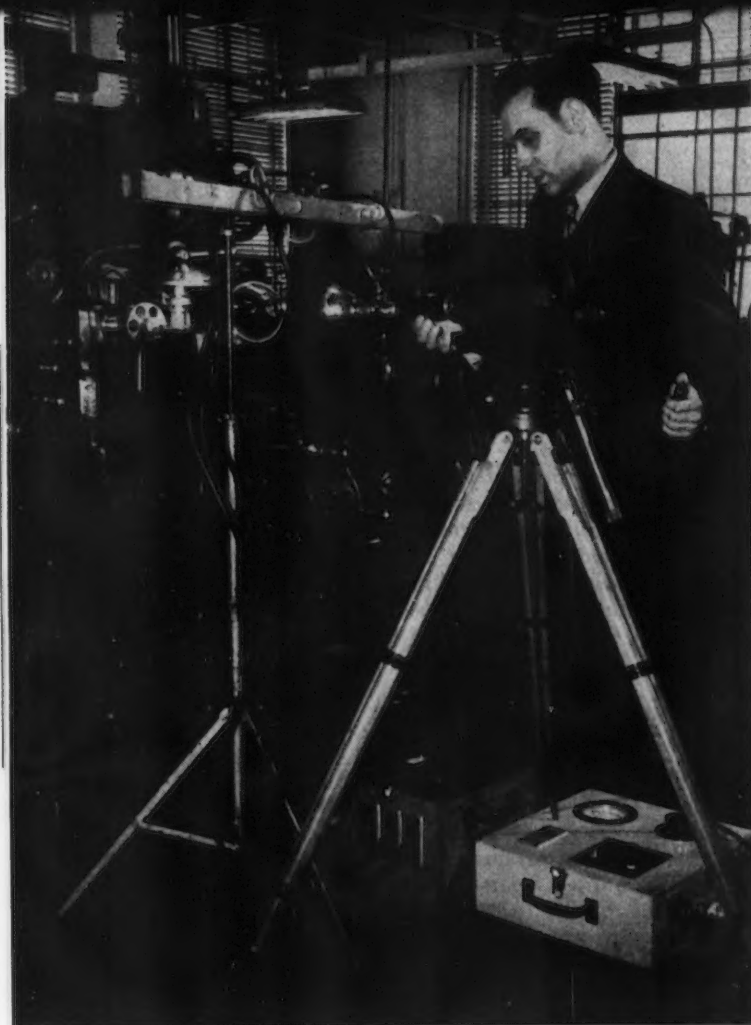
Arrangement of high speed camera equipment for photographing a milling operation. o o o
